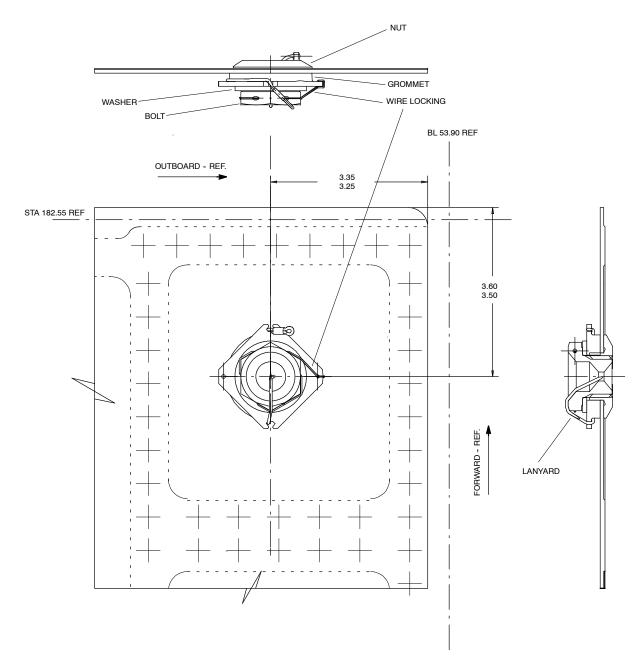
LH Stub Wing Inspection Hole (RH Similar)
